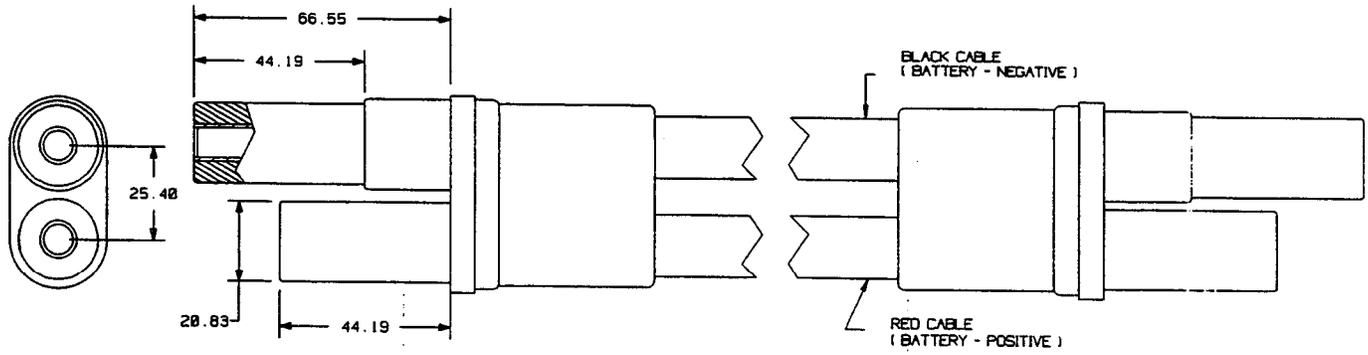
PLUG ASSEMBLY (MACHINE TO MACHINE)
